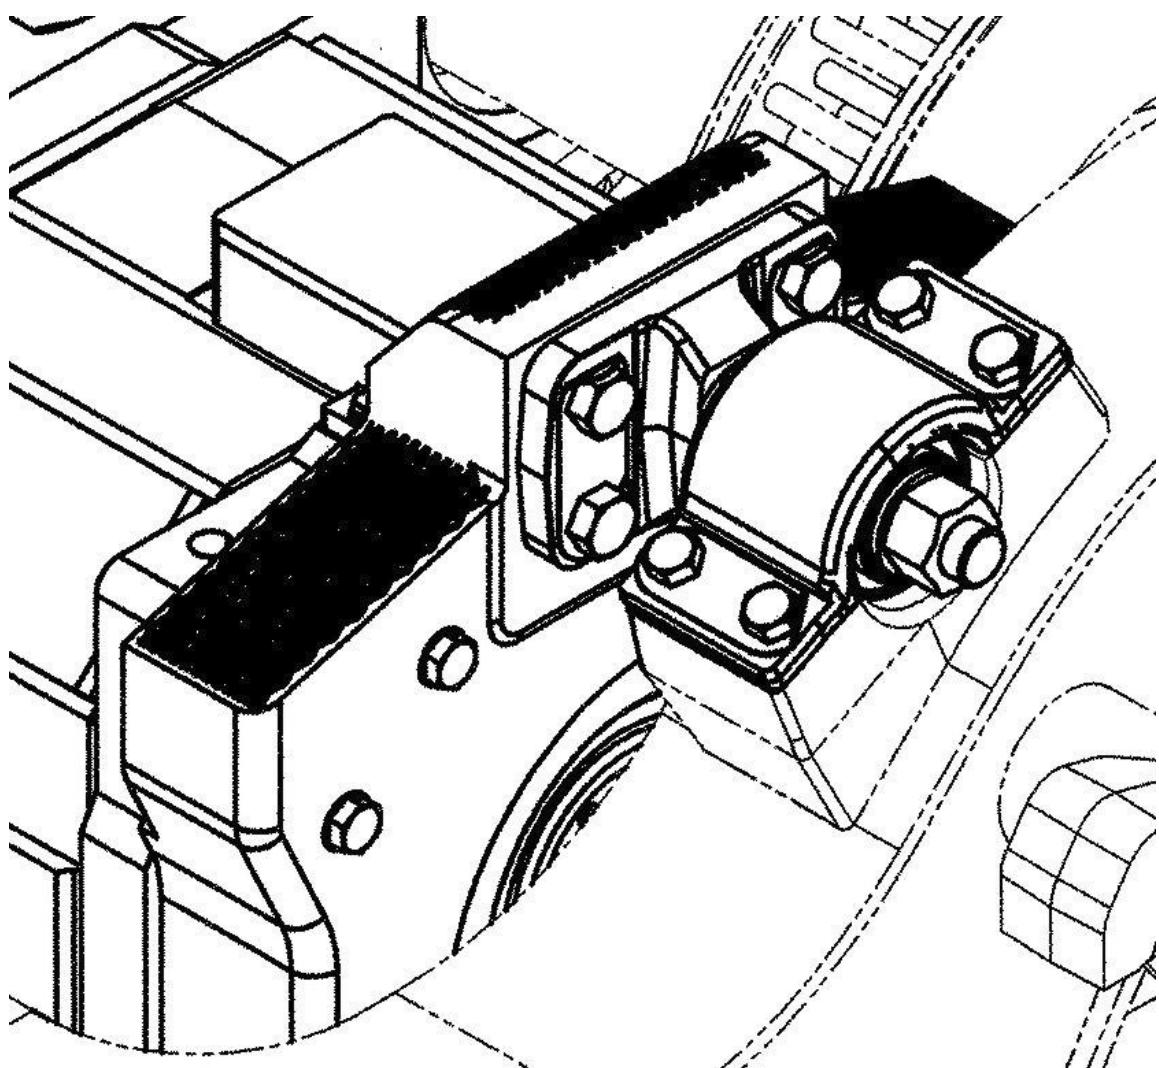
TRACTION MOTOR INSPECTION - DETAIL "A"
